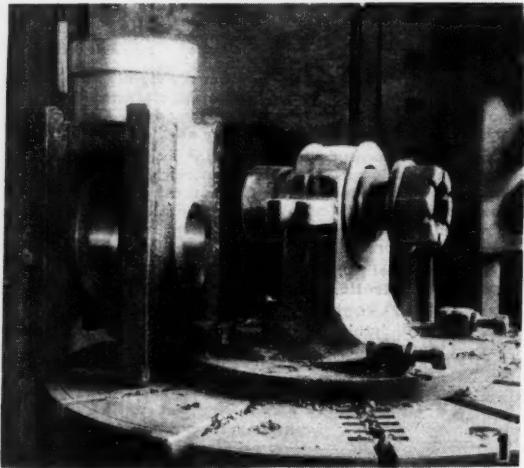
Fixture for boring and turning piston-pin end of crosshead. Finished piece shown at left.
